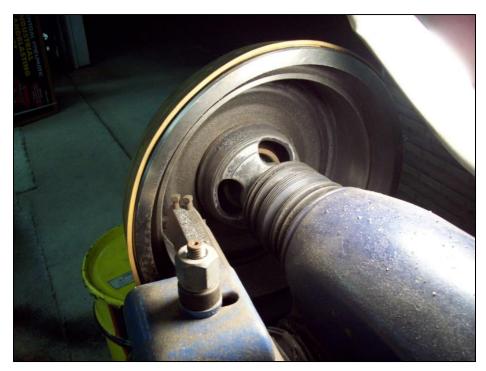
& 9: After the centers of the drums have been pressed down the appropriate amount, they now go on the brake lathe for truing up the brake surface and making the final cuts.
